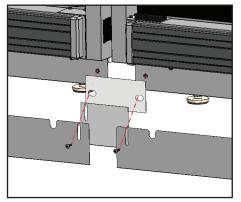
Exploded view of installing kickplate junction pieces (held in place by kickplate screws E) between the front kickplate support and the front kickplate.
